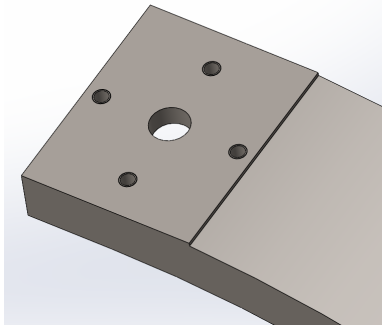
Screw's holes for coupling the beam one to the flange and the motor in revolute joint 2
